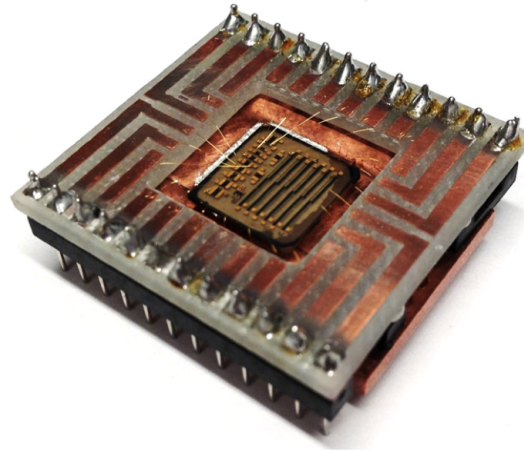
PCB and copper helium dip probe holder with sample wired up using a gold wirebonder. The sample size is  $1\text{cm}^2$
